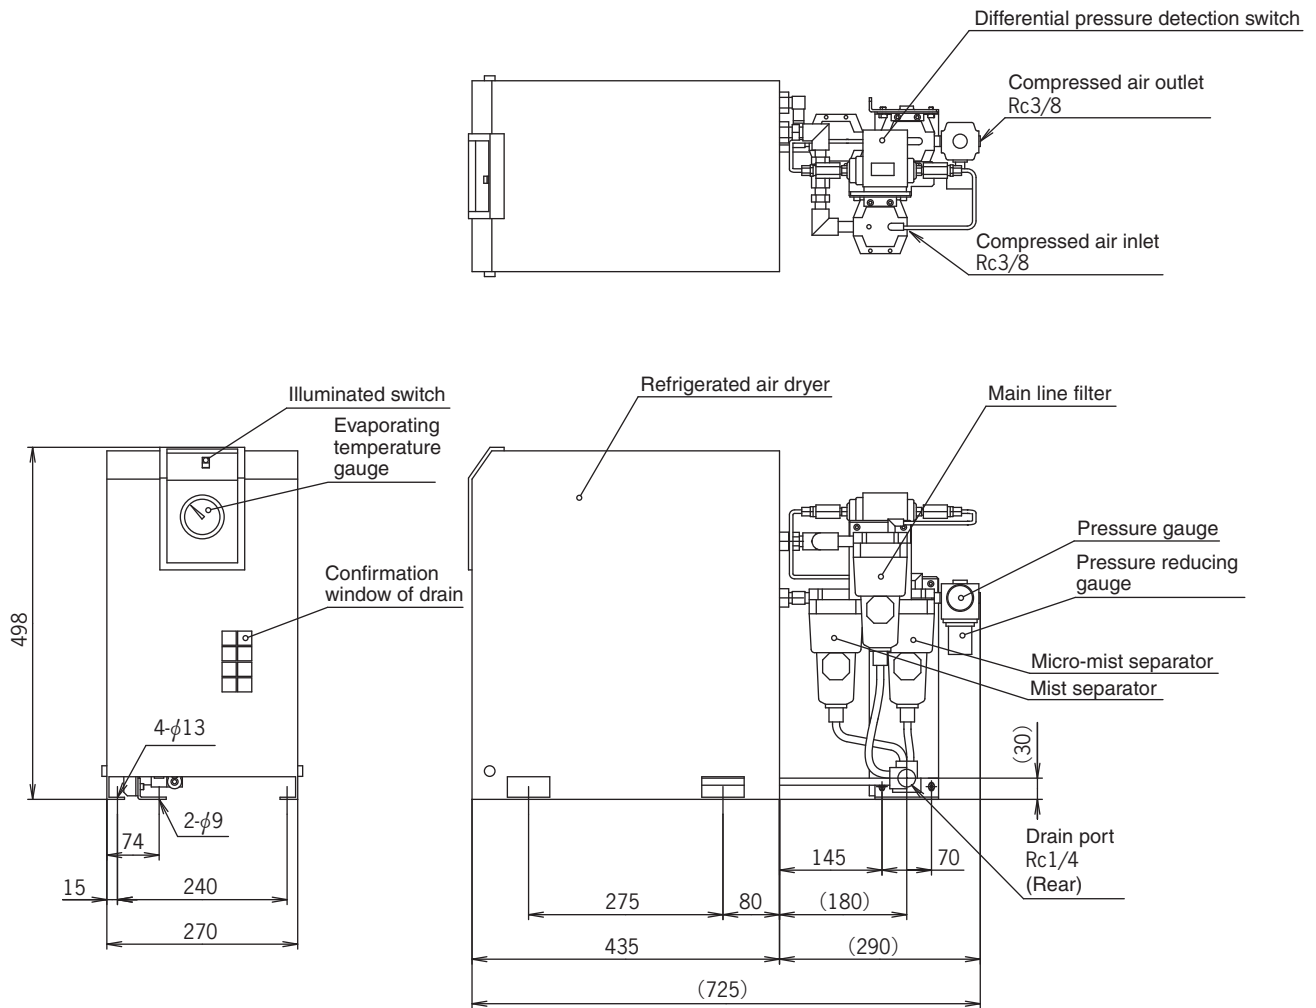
Outline drawing of KOYO air cleaning unit
